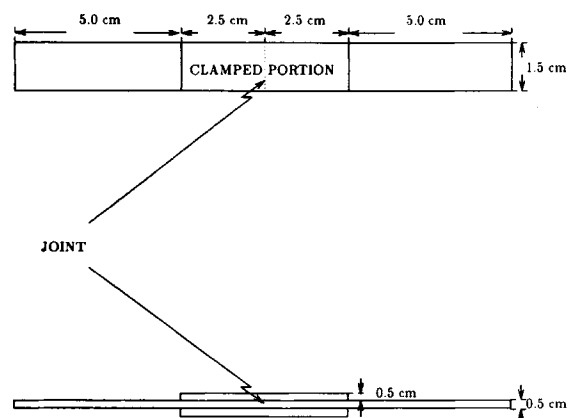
Specimen (of a typical beam) as per ASTM standards, tested on a universal testing machine.
